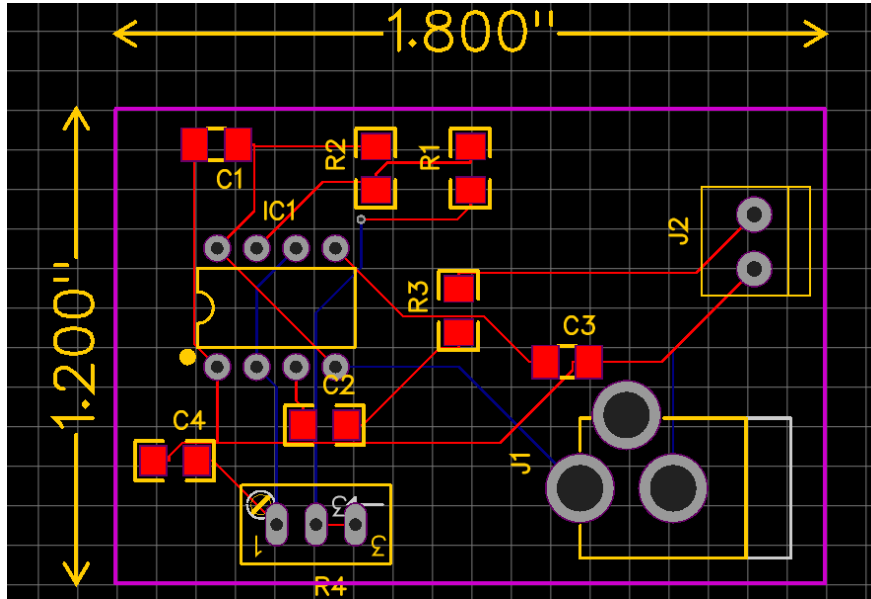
Perimeter Wire Generator Circuit PCB made by Brandei Dieter
